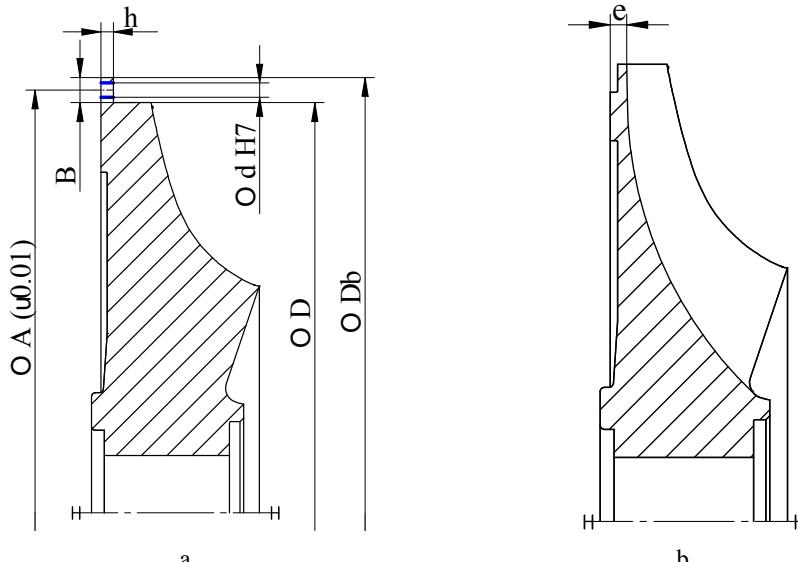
Proposal for correct impeller indexing and fixing at machining and measurement: after turning with technological changes (a); at final (b).
